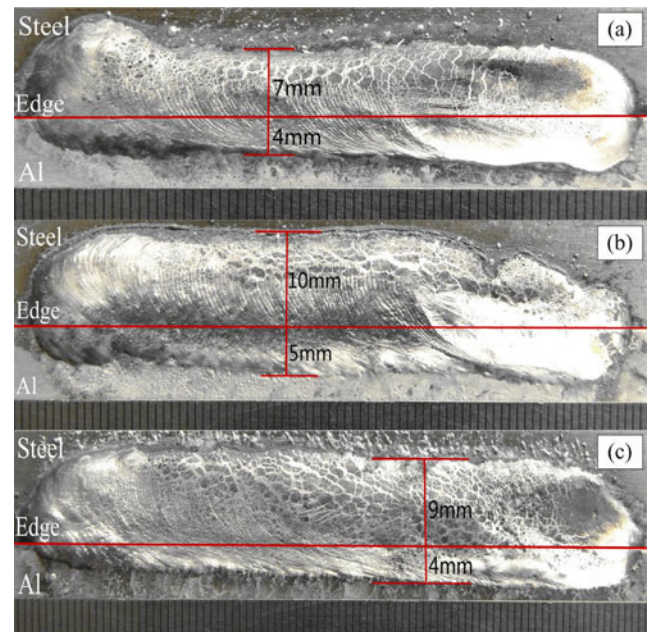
Weld appearance with different torch aiming positions when α is 20° and β is 20° . $L = 0$ mm (a), $L = 1$ mm (b), and $L = 2$ mm (c)
